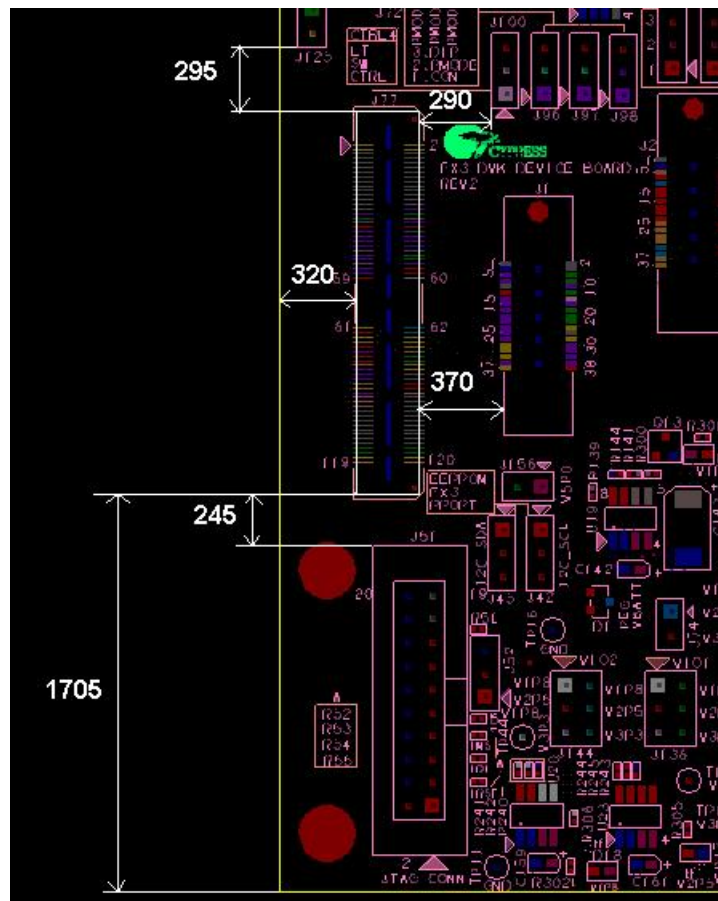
Distance from Center of Pin 1 to Top Edge of Board (all dimensions in mils)
